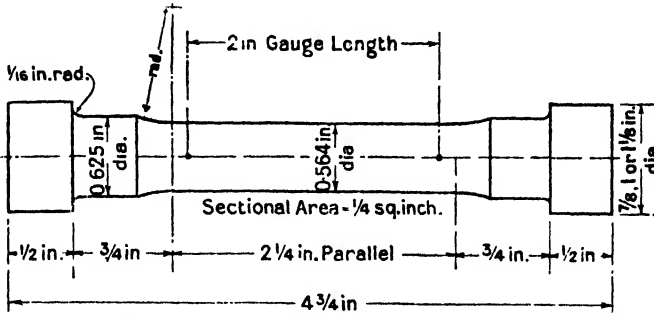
DIMENSIONS OF STANDARD CYLINDRICAL TEST PIECE
